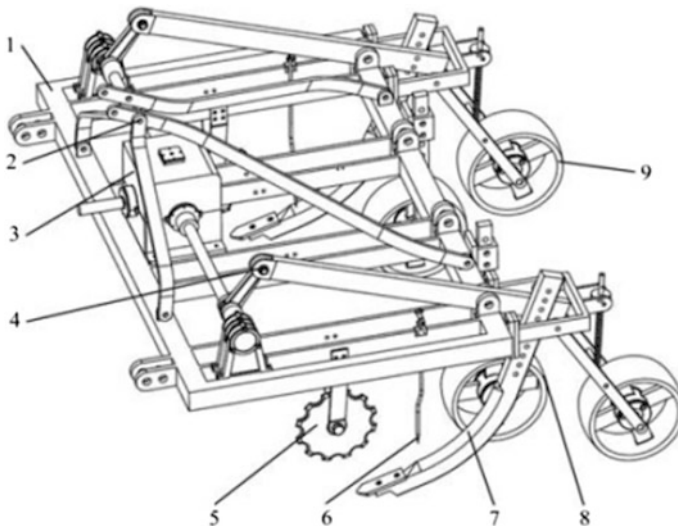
1. Frame 2. Suspension bracket 3. Gear box 4. Vibrator 5. Coulter 6. Grass breaker 7. Shank 8. Gauge wheel 9. Press wheel (Source [6])
